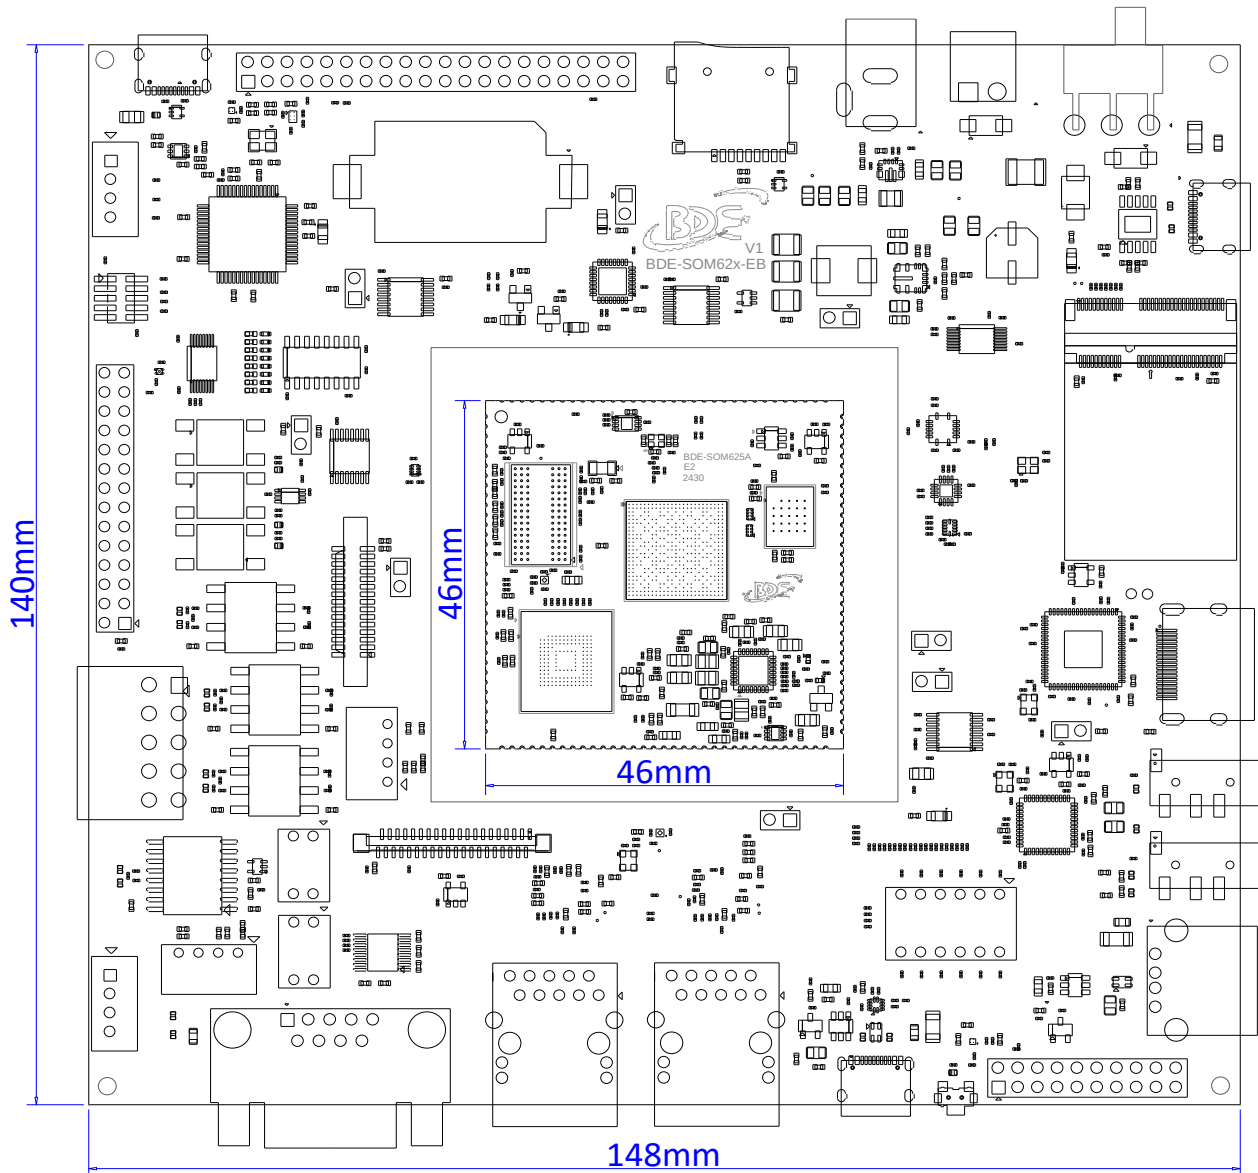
Mechanical Drawing of BDE-SOM62x-EB
